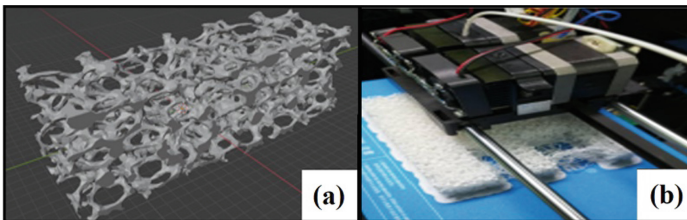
(a) CAD drawing and (b) printing process (stereolithography).
